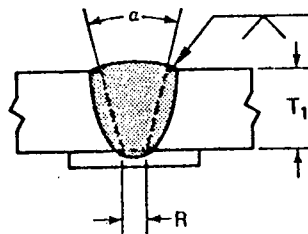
Prequalified complete joint penetration groove welded joints
